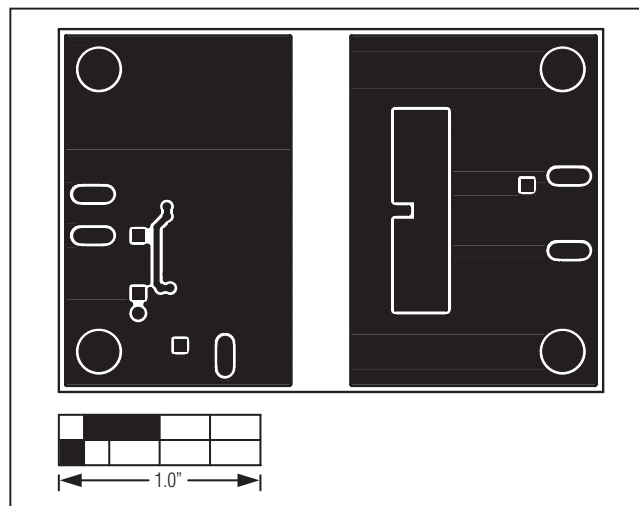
MAX13256 EV Kit PCB Layout—Solder Side
